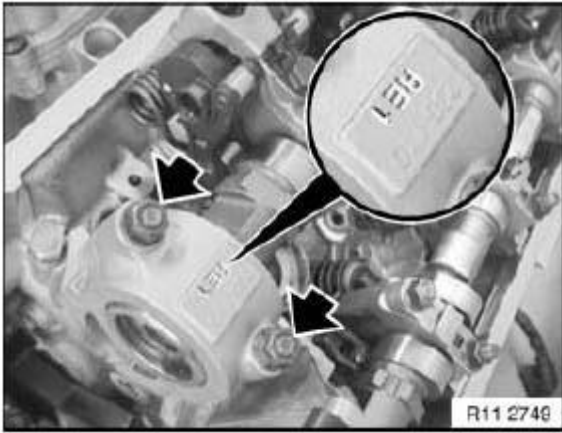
Locating Camshaft Bearing Caps Of Cylinders
